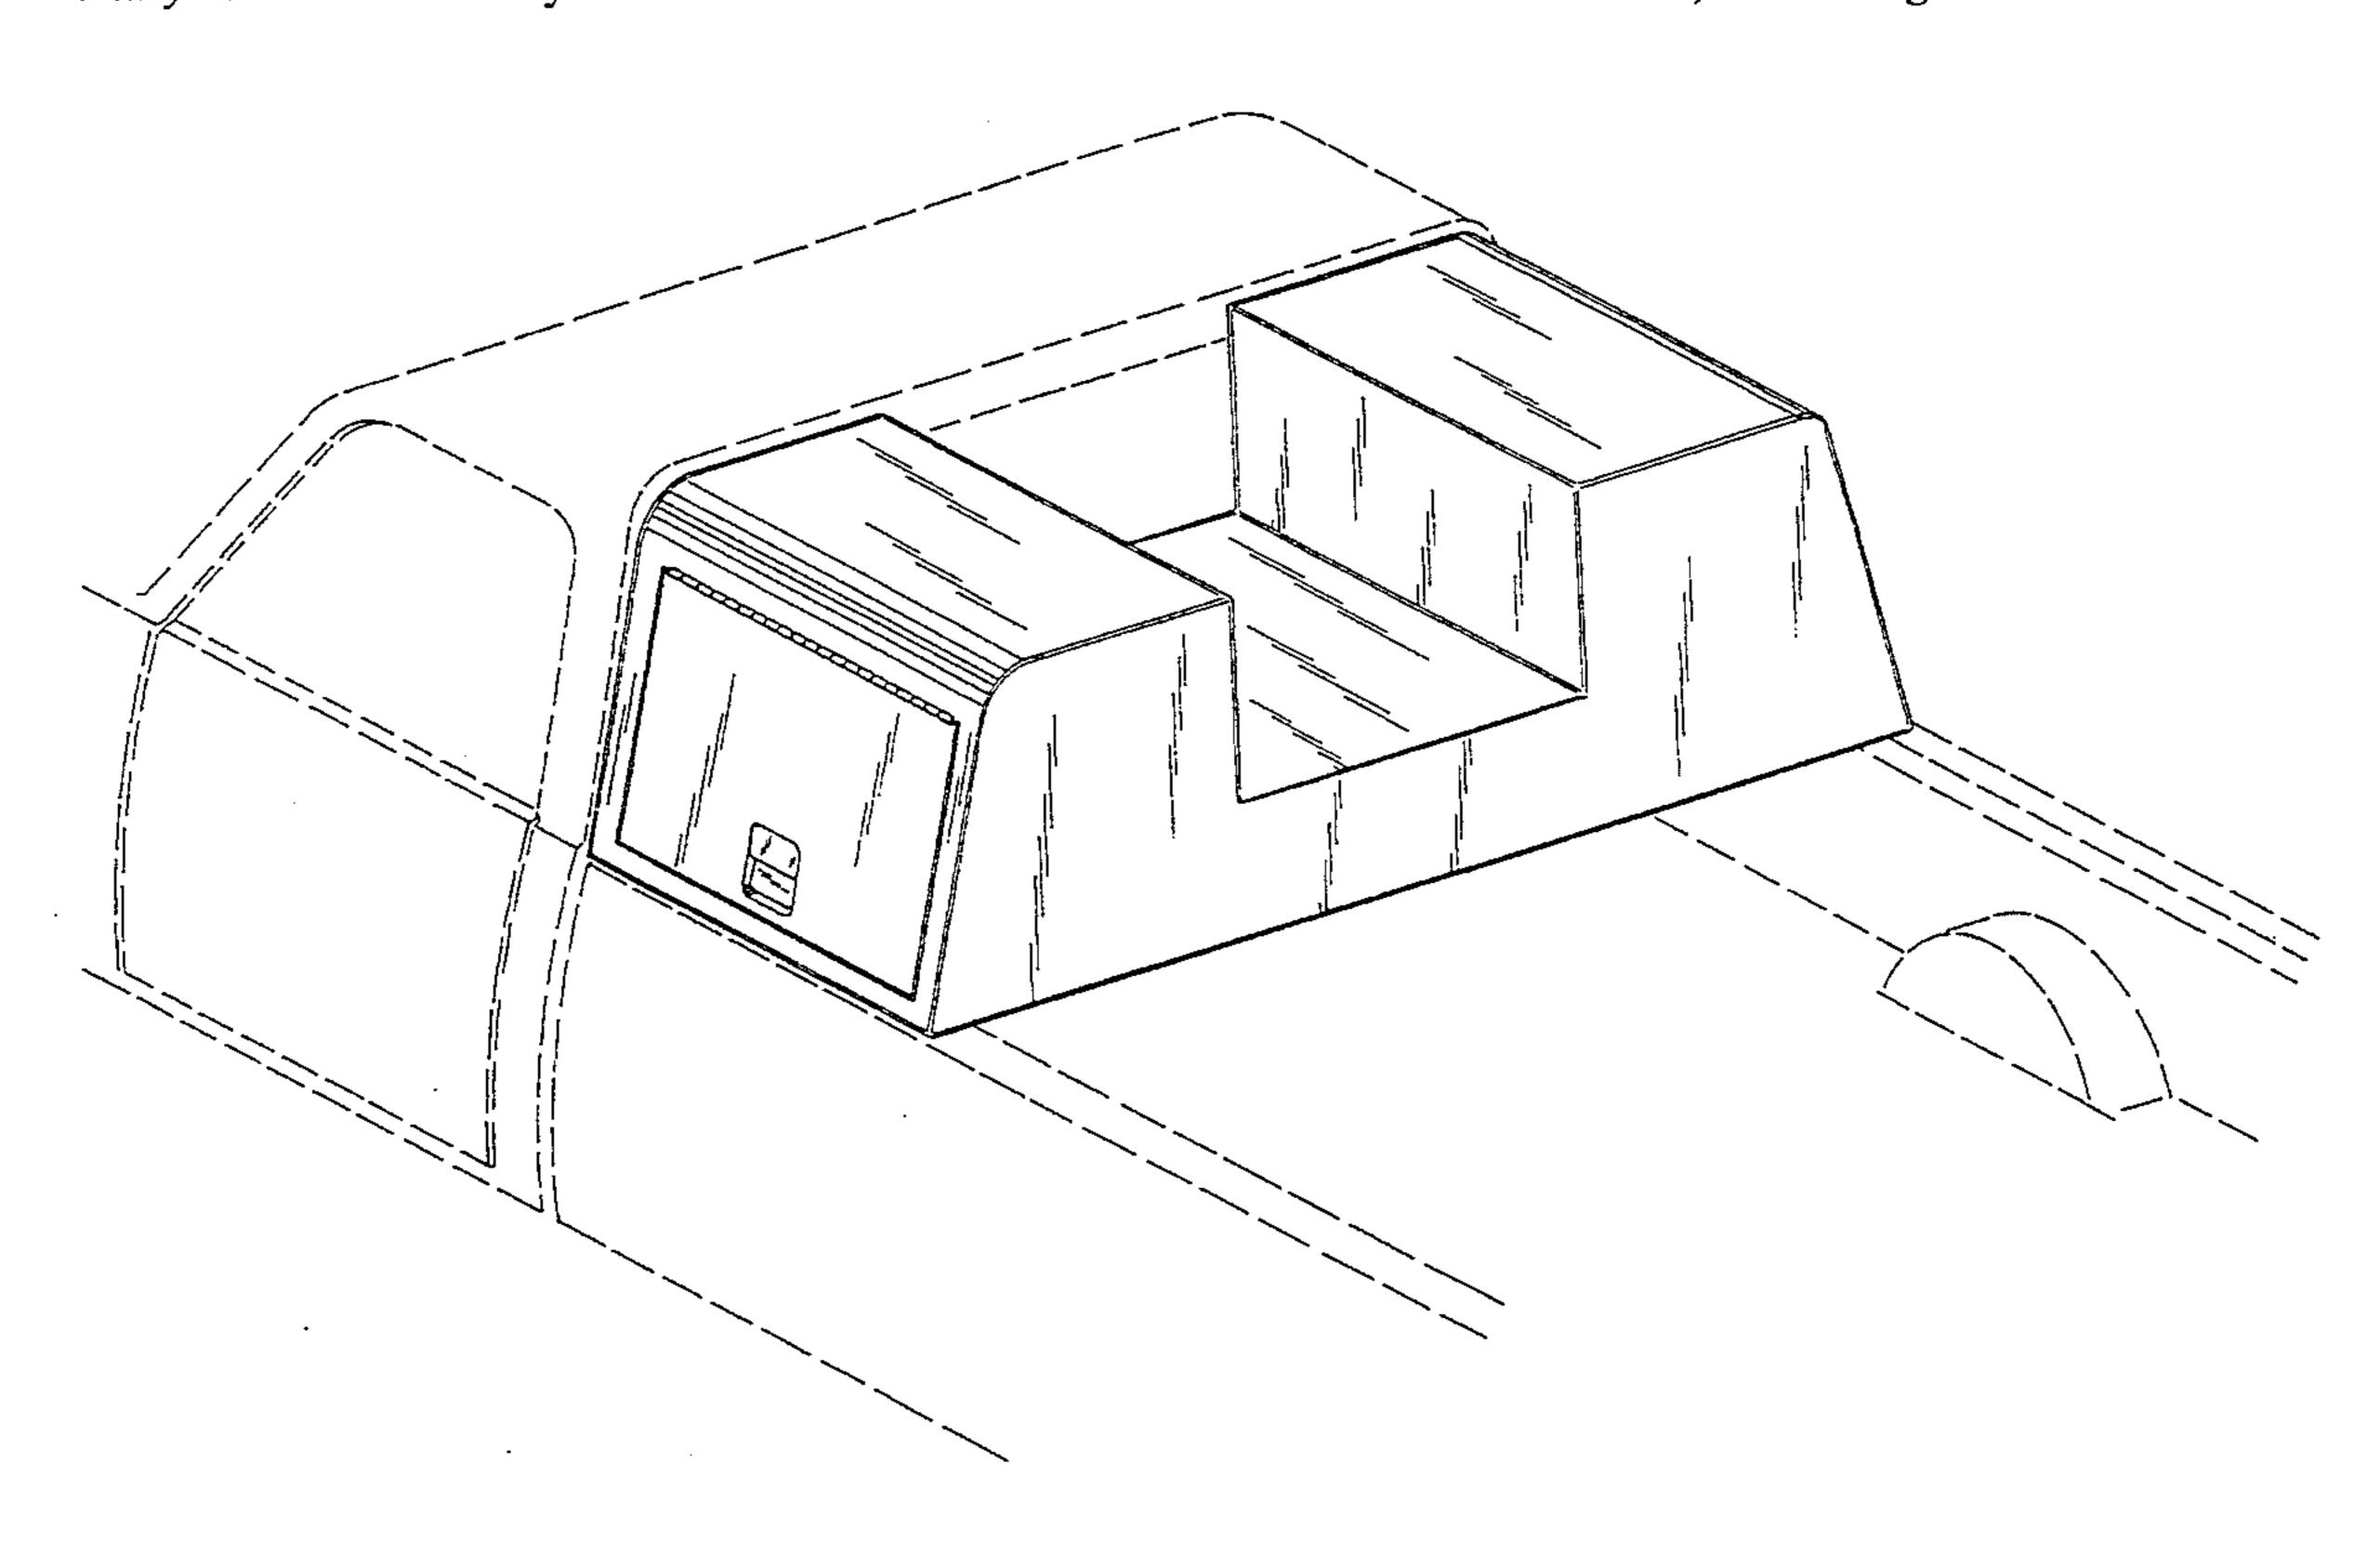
is a right side elevational view similar to FIG. 3 but showing the toolbox mounted in the bed of a pickup truck; FIG. 7 is an isometric view showing a second emboidment of the truck mounted toolbox of my design;
